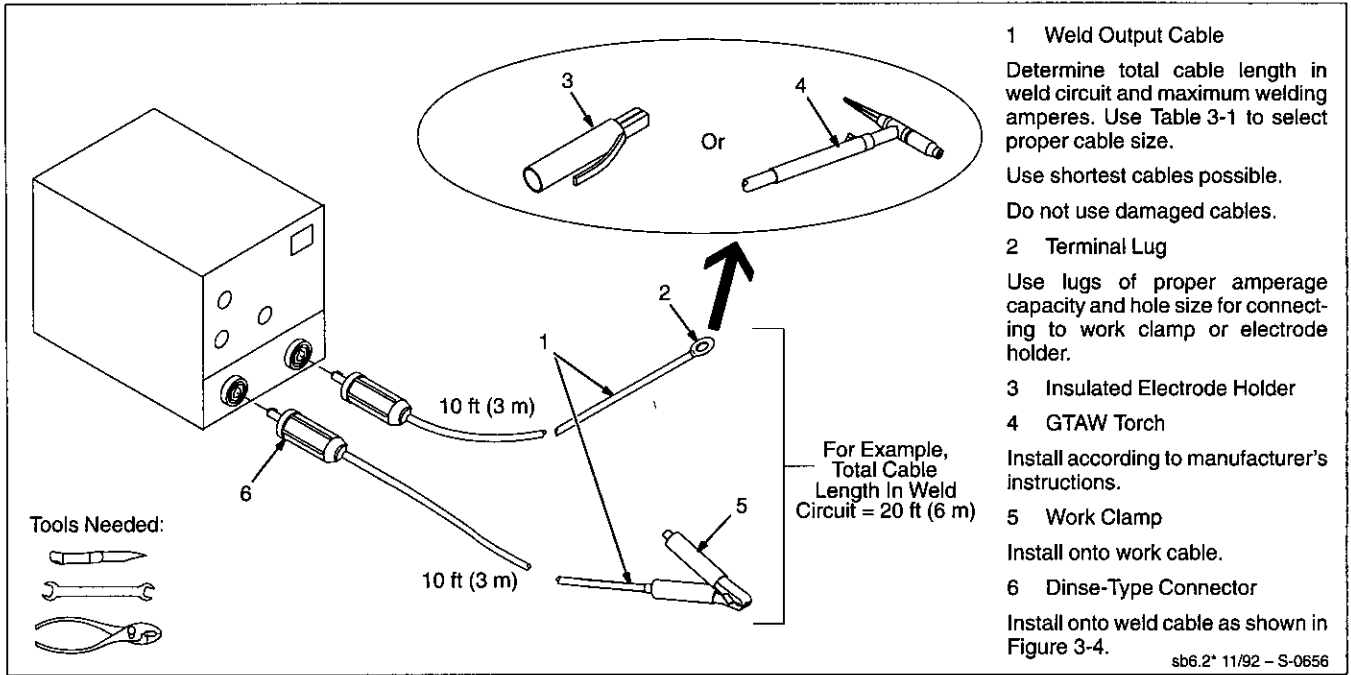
Selecting And Preparing Weld Output Cables
